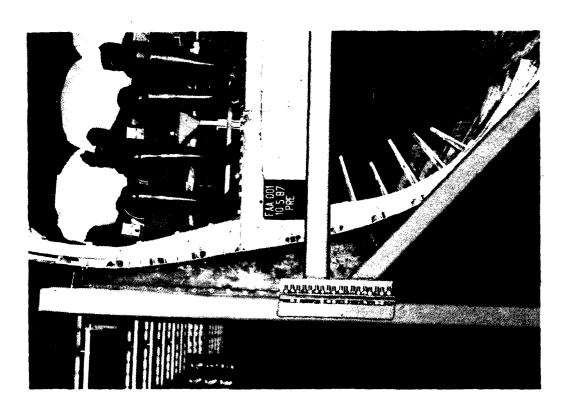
FUSELAGE ATTACHMENT - VIEW 3
